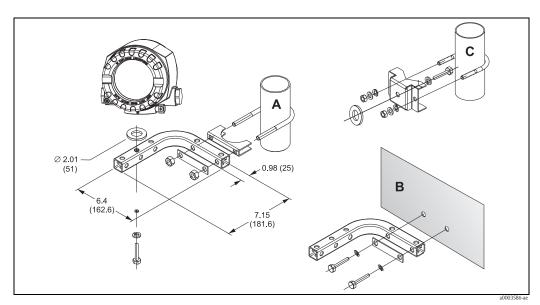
Installation of the field transmitter using the mounting kit, dimensions in in (mm)
